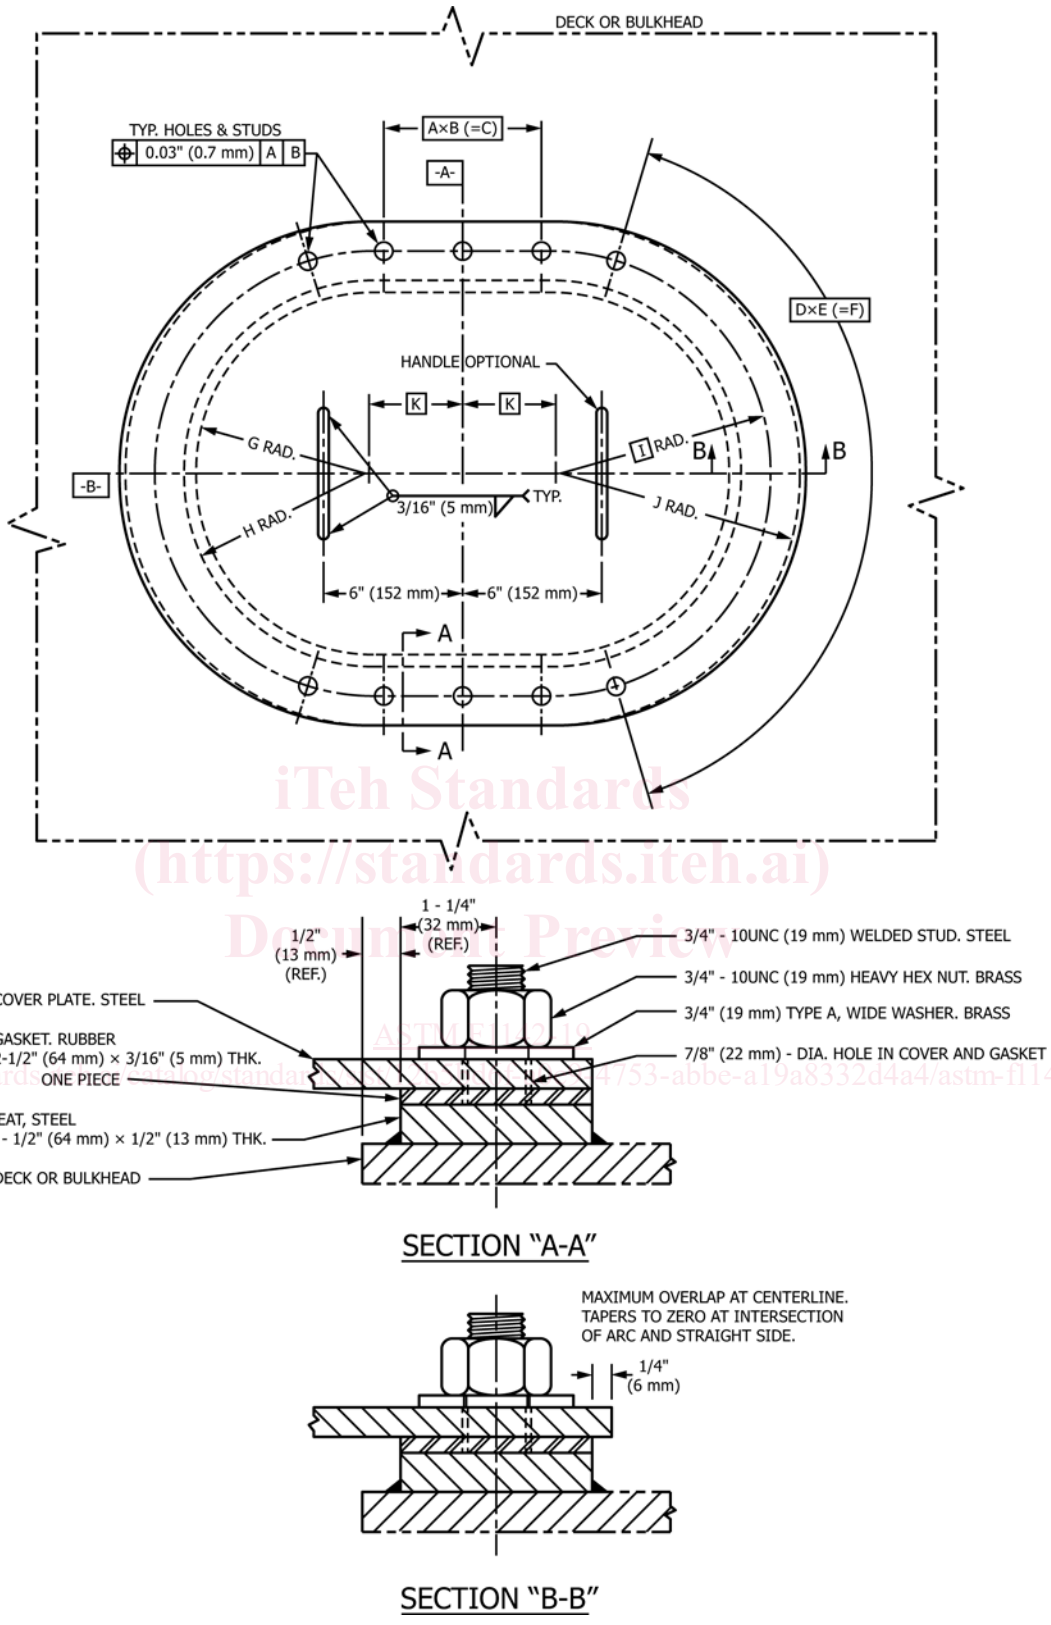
Manhole Cover Assembly, Bolted, Semi-Flush, Oiltight and Watertight
